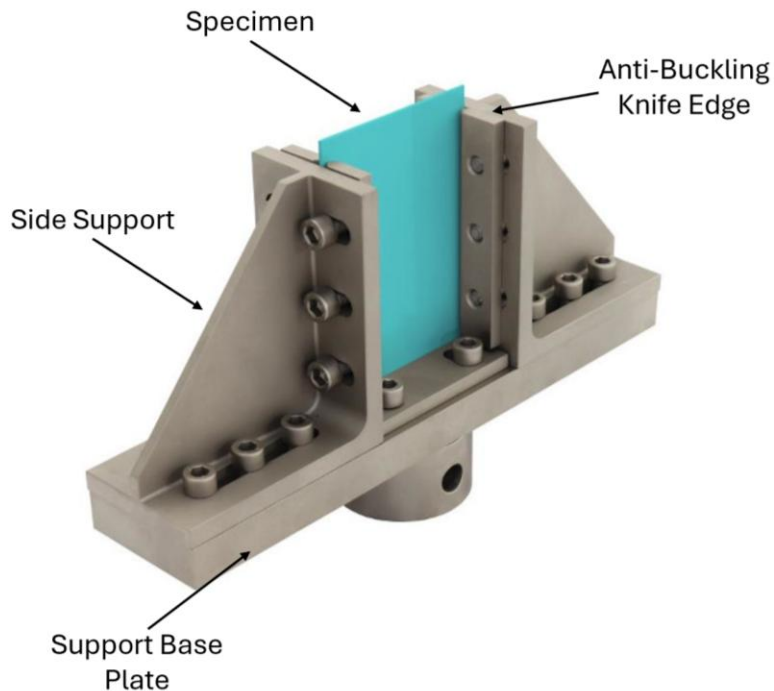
CAI Fixture ASTM 7137 (Modified; Image Courtesy: [131])
